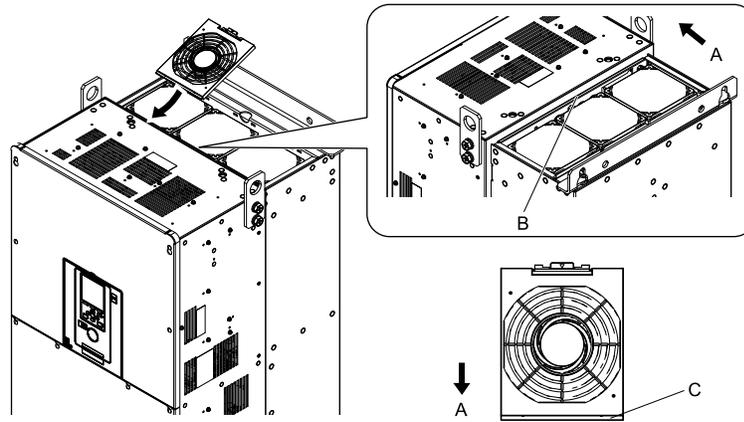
Put the Cables and Connectors in the Drive Recess
